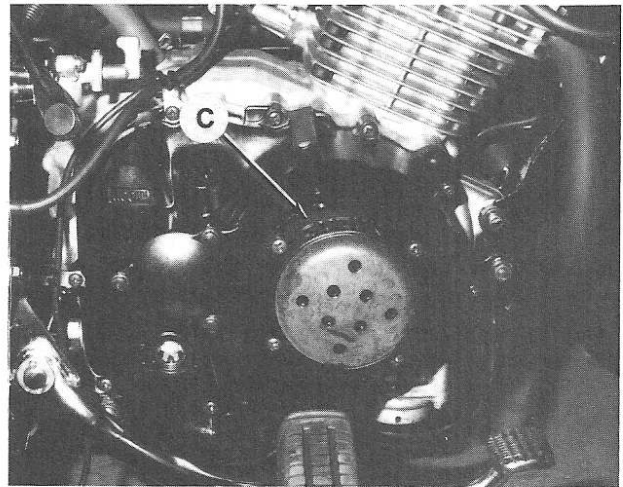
Remove side cover (C) to obtain access to clutch adjusting screw.
